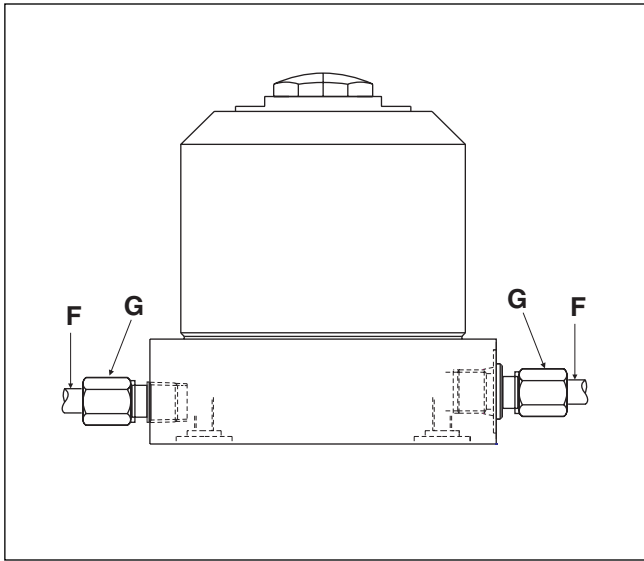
"Air Purge" / "Air Spring" work support using side breather port
